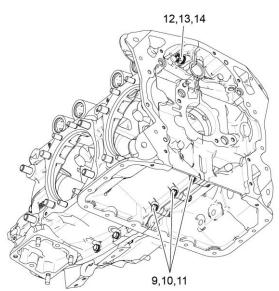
A Crankcase Attaching Parts (C1A6 and C3A6)
